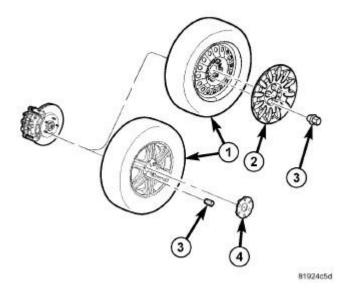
Tire & Wheel Assembly Components Courtesy of CHRYSLER GROUP, LLC
